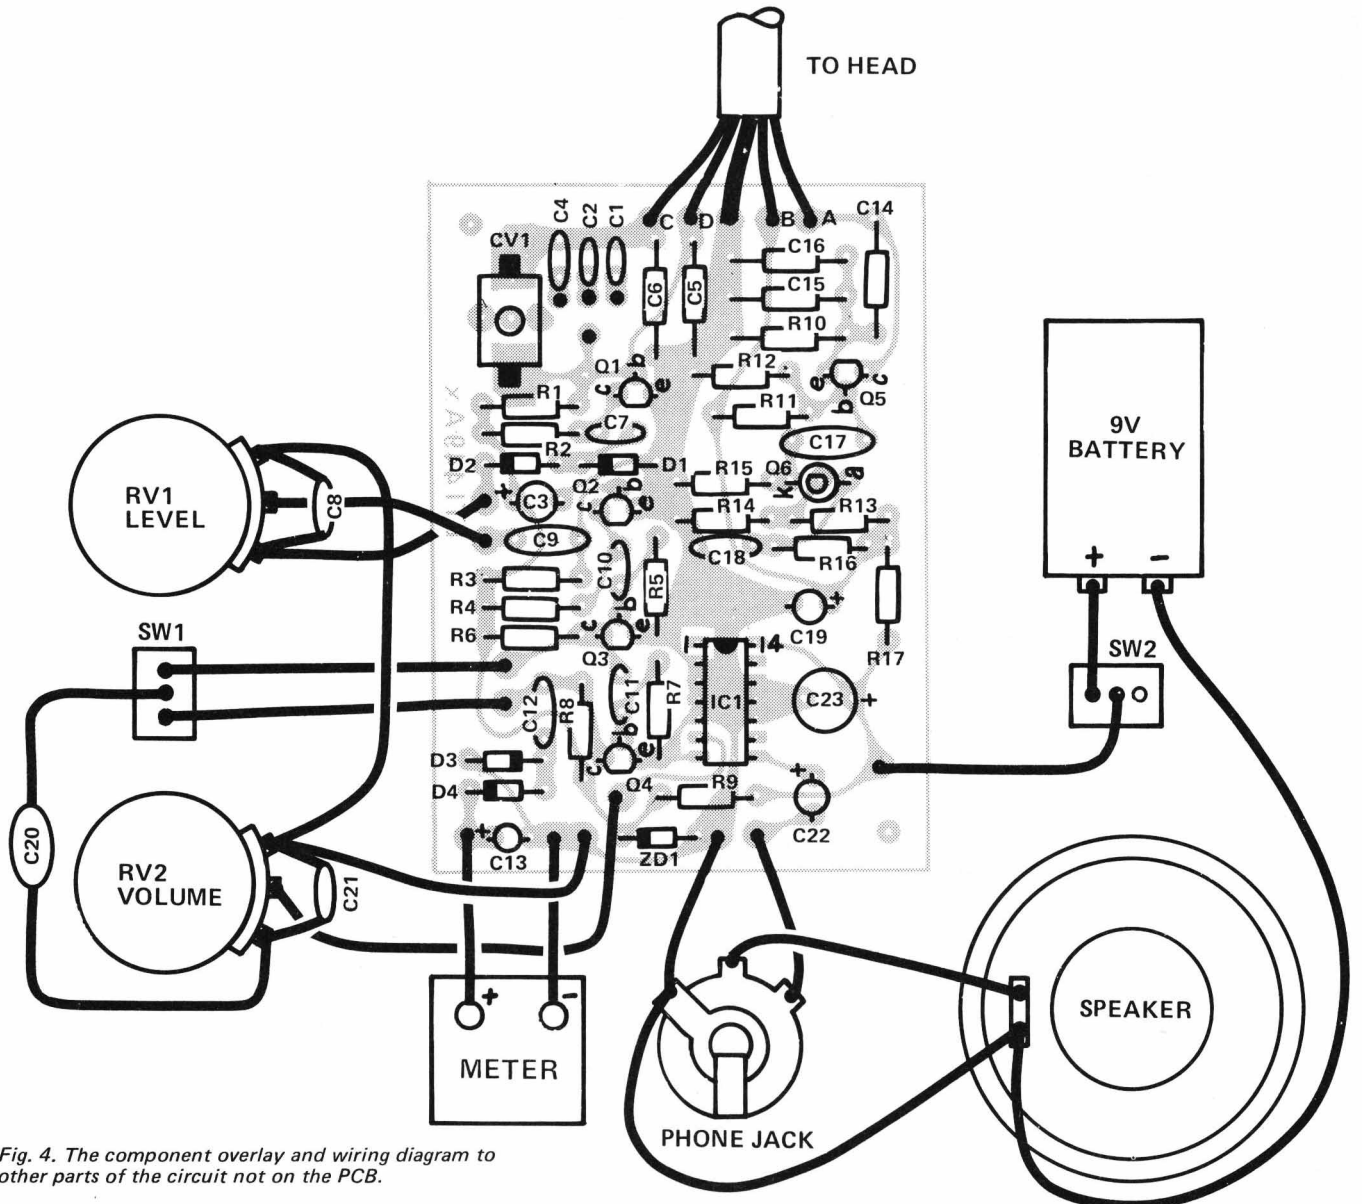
The component overlay and wiring diagram to other parts of the circuit not on the PCB.
